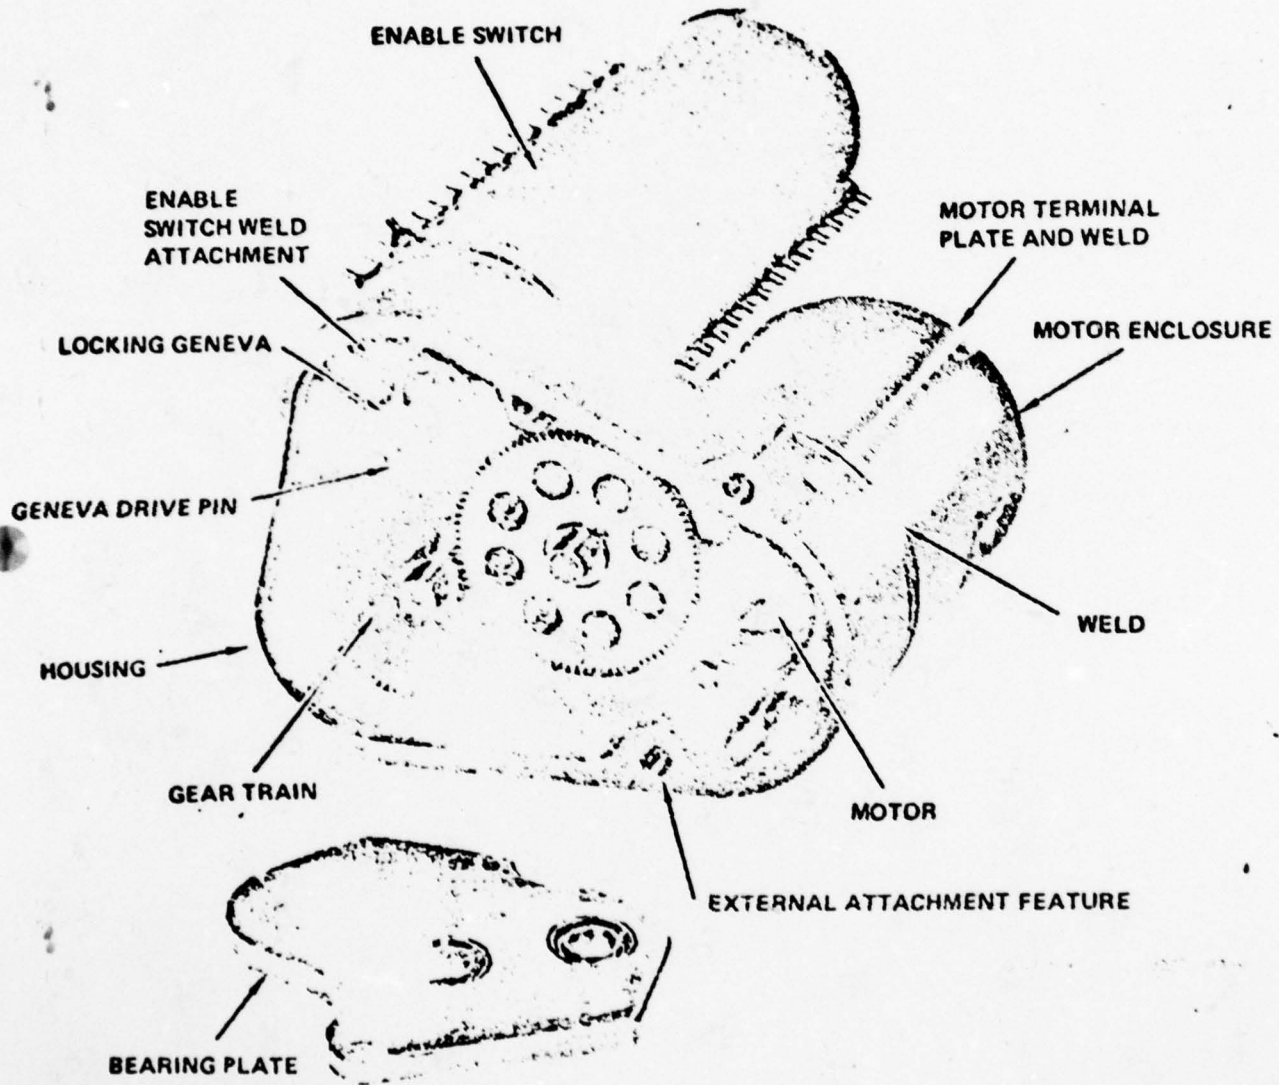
Enable Switch Operational Model (Bearing Plate Removed)
